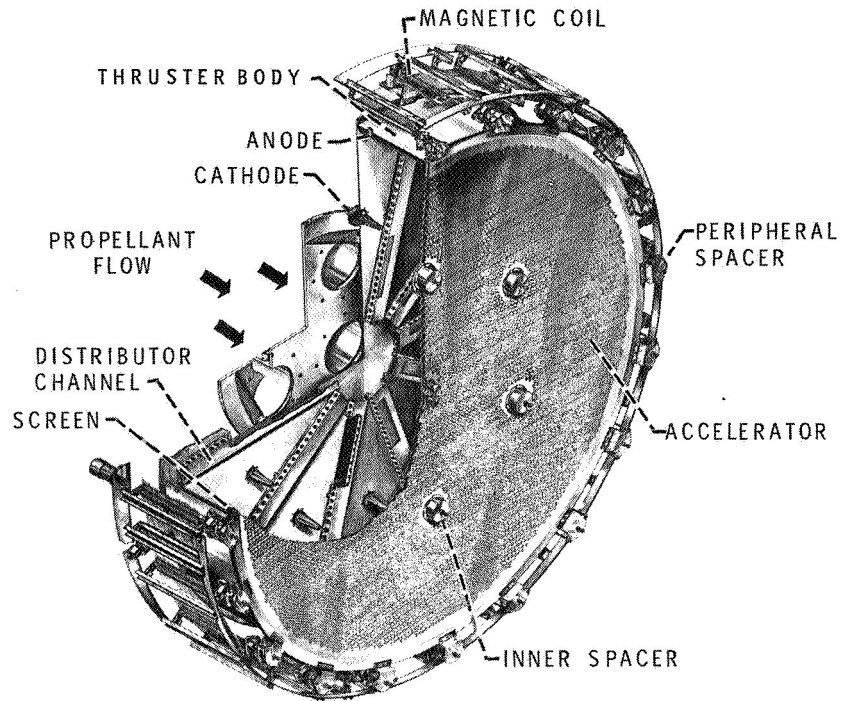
Cutaway view of 1.5 meter diameter Kaufman thruster.
